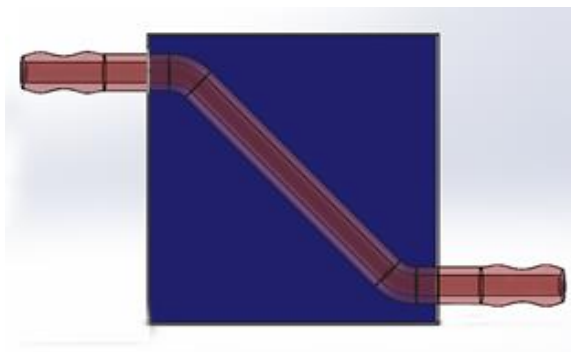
CAD model of the 3D printed multimaterial heat exchanger.
